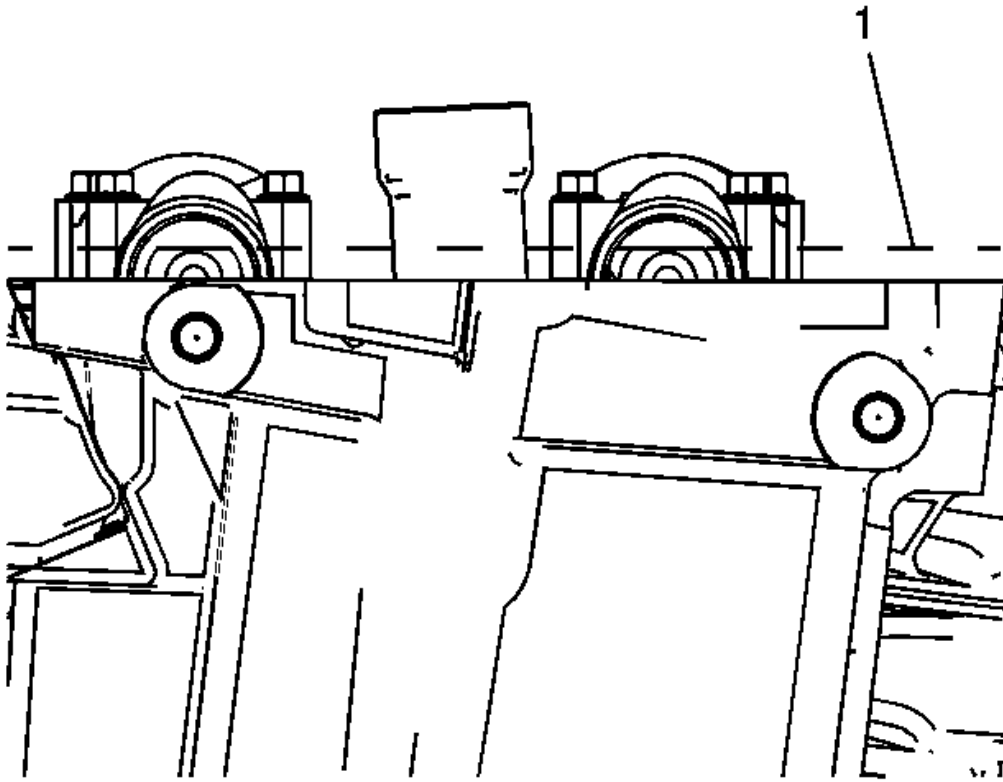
Identifying Camshaft Neutral (Low Tension) Position
